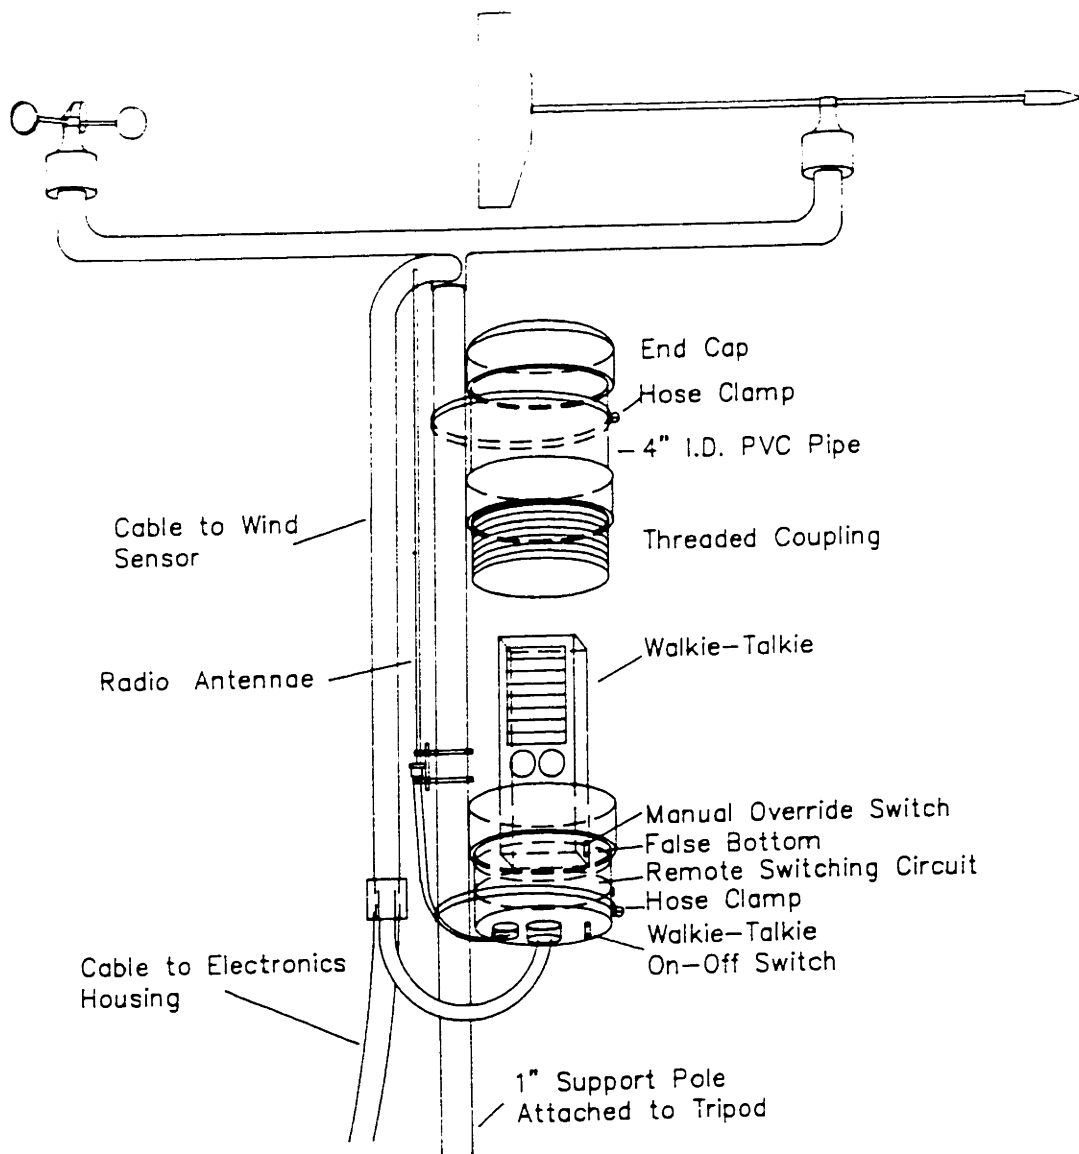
Remote radio control assembly together with mounting and wind sensors.
